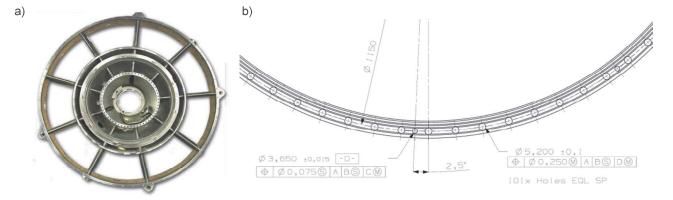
Parts of the fuselage type of an aircraft turbine engine:
